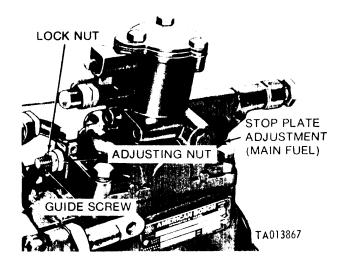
Adjusting stop plate guide screw and stop plate for desired fuel delivery (code C, D, and E pumps).
